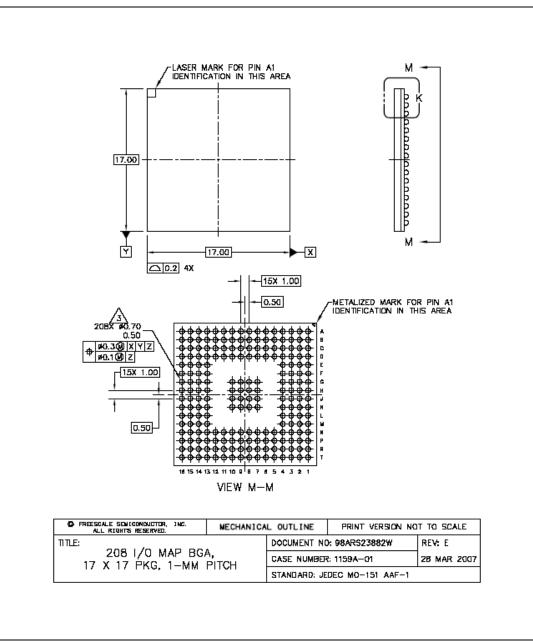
208 MAPBGA package mechanical drawing (Part 1 of 2)
